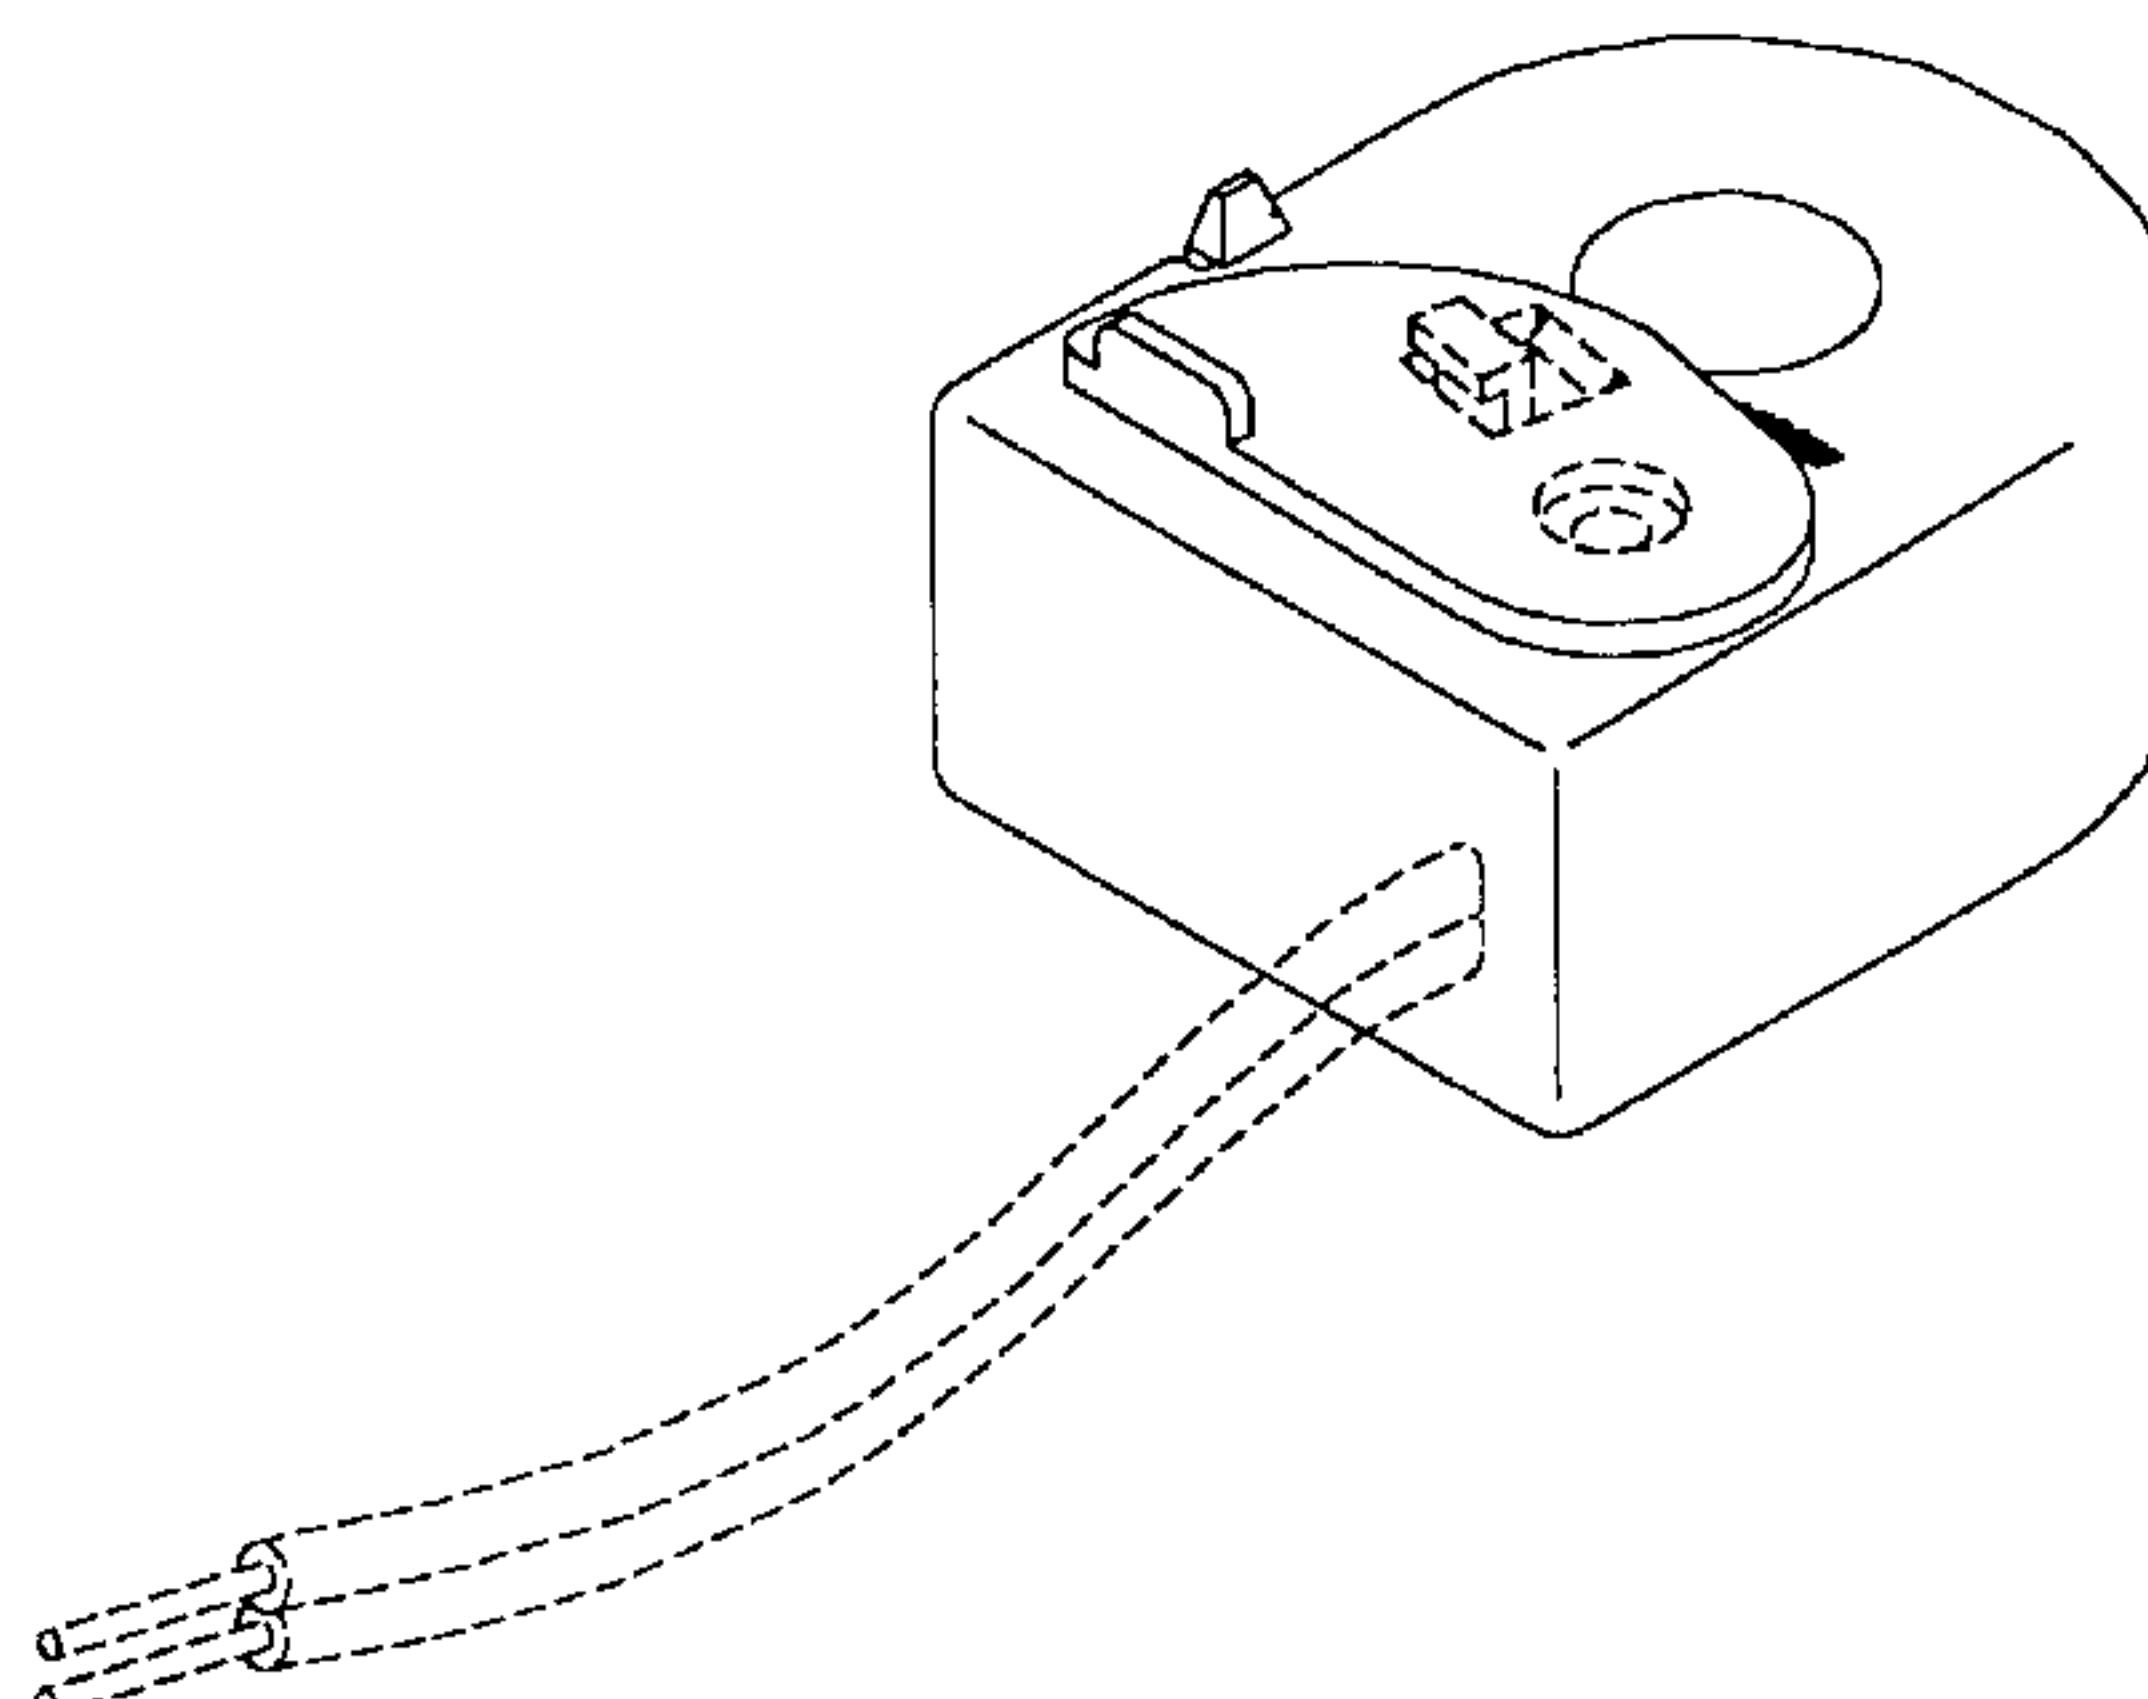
is a side view of the electrical current sensor from the top of FIG. 22.
